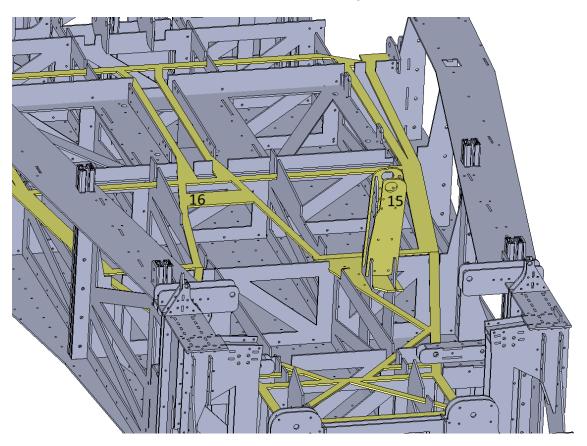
Measuring piece in front of the steering tube to measure if the tube is concentric and within distance. Also a visualization of the negatives of the lower chassis tubes can be seen.
